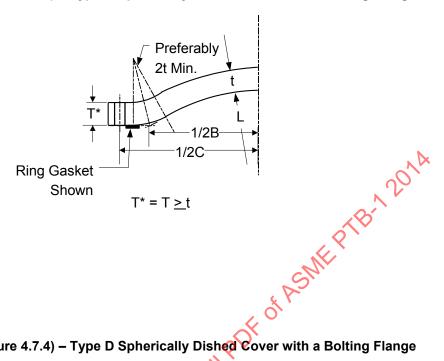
(VIII-2 Figure 4.7.4) – Type D Spherically Dished Cover with a Bolting Flange
